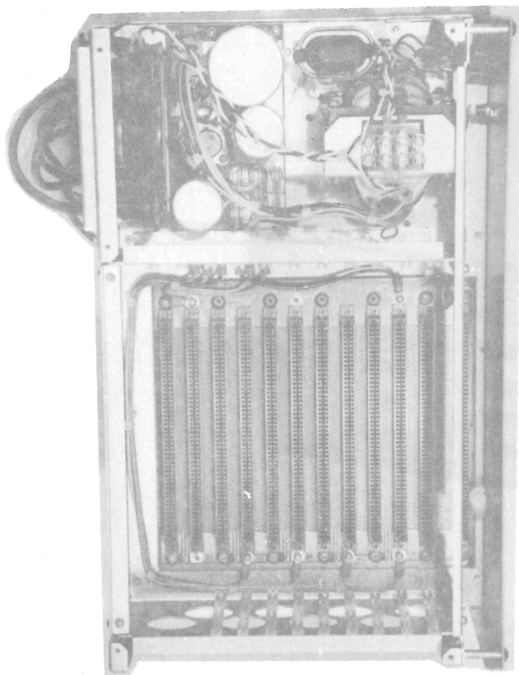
ASSEMBLY WITHOUT COVER
